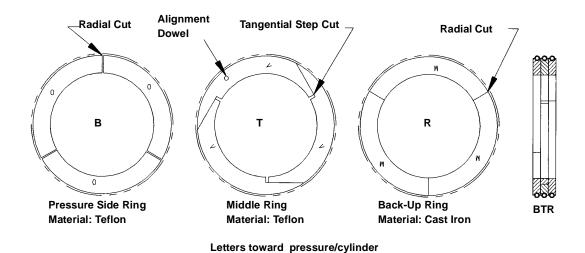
Type "BTR" SINGLE ACTING SEAL SET
